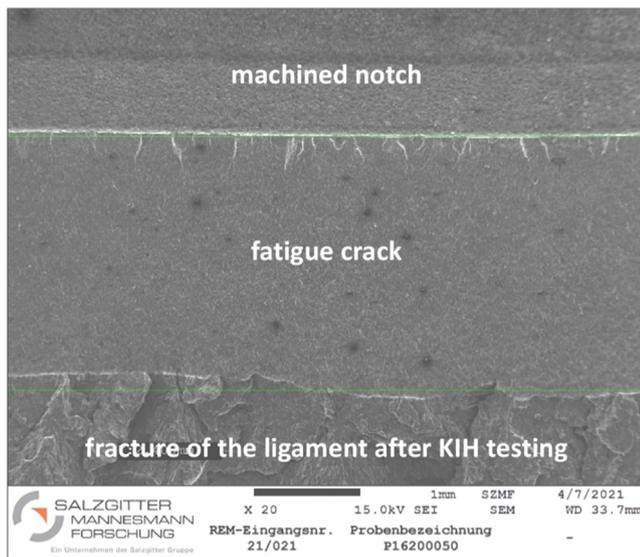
Typical fracture surface of a K_{IH} specimen without hydrogen crack growth.
